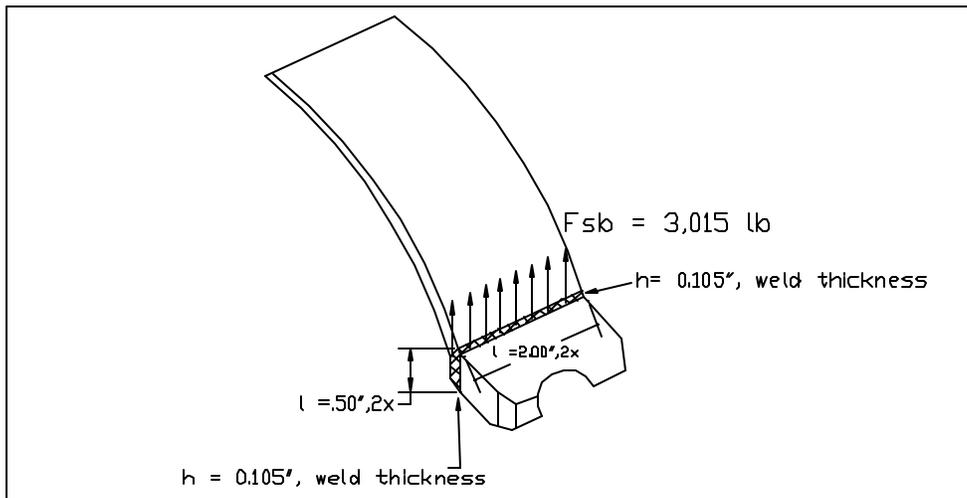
Weld Geometry at Swing Bolt Block
